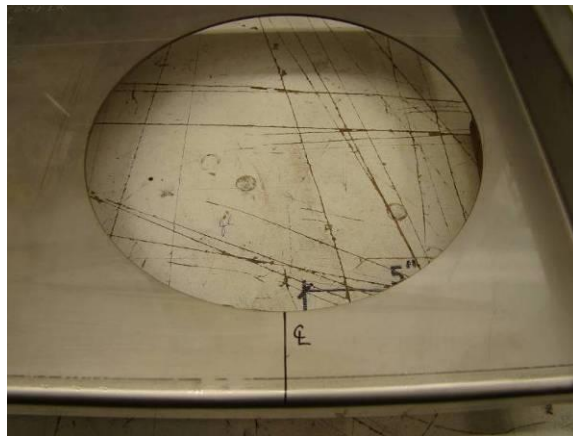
Left-to-right centerline placement. The centerline is placed at a 90° to the front edge of the sheetmetal.
